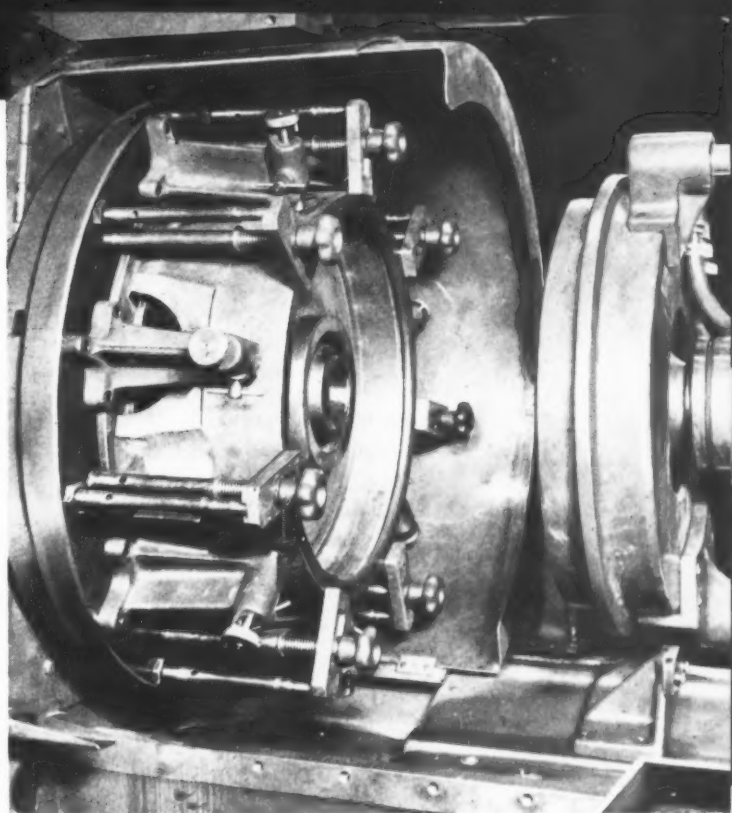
Set-up for Groove-grinding Operation on Steel Crankcase Section of Wright Aircraft Engine
